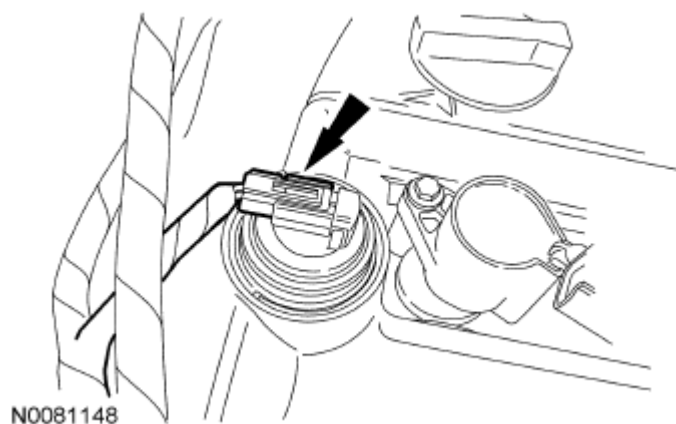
Locating Variable Camshaft Timing Electrical Connector
